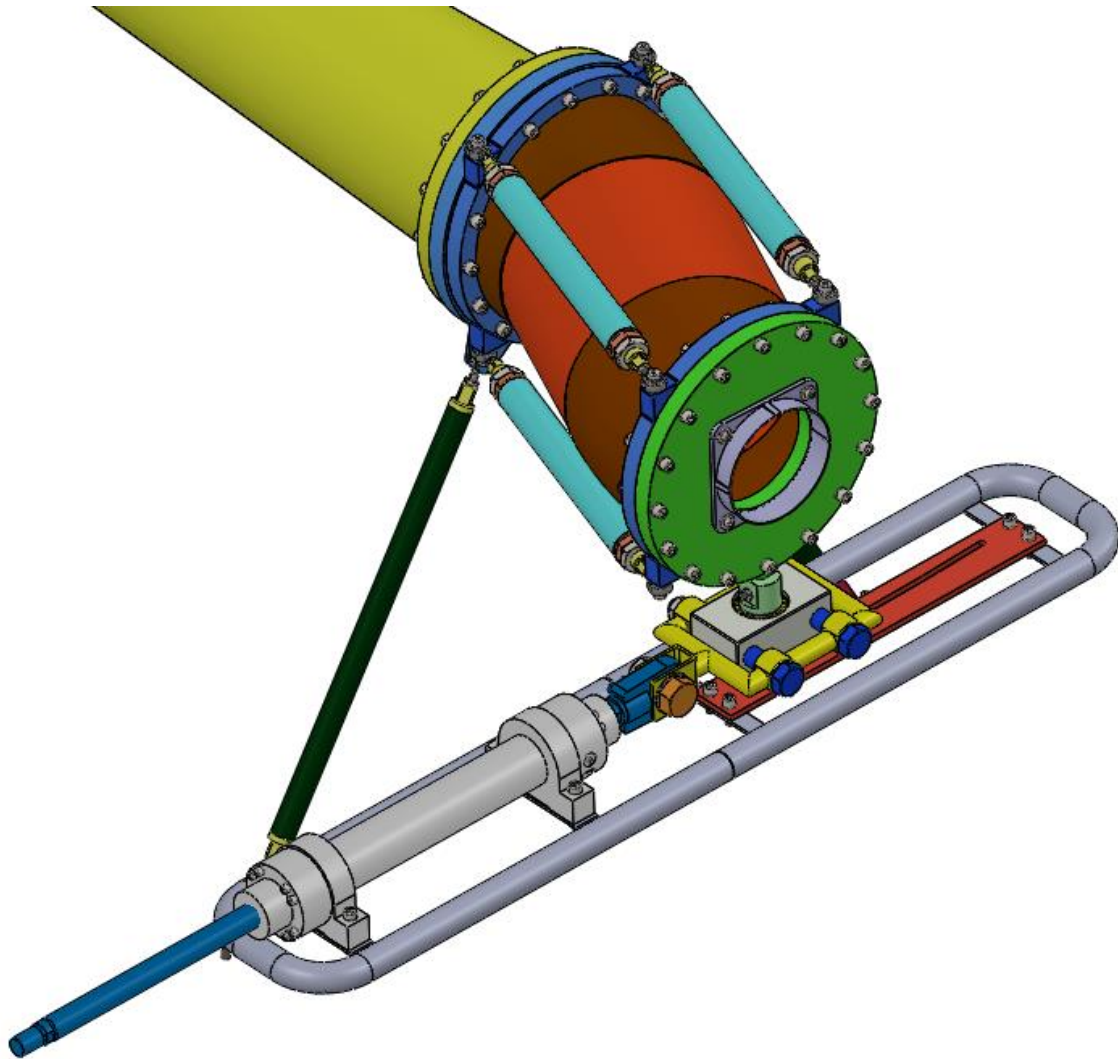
Deflected bellows weldment with slender struts in extreme position
